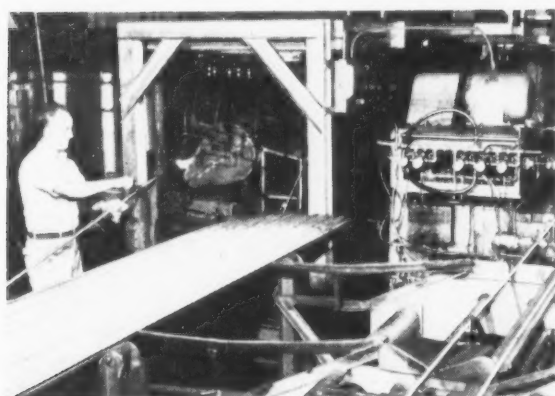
Overall view shows operator at discharge table checking bars delivered from machine.
